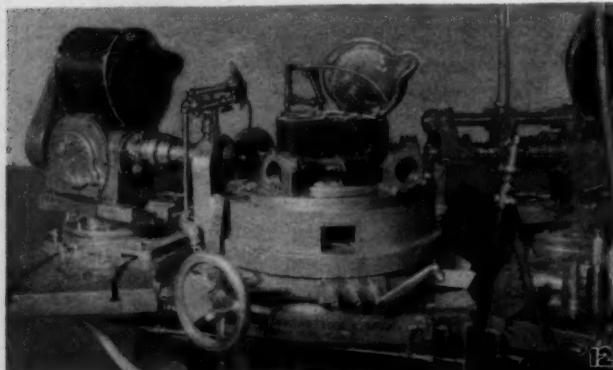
Rough boring, finish boring, and tapping the distribution port holes. Three tools operate simultaneously on this Bradford. Fig. 13—Boring the starter motor and generator holes. Fig. 14—Drilling the stud holes in the flange of the rear section.
